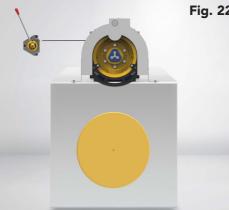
Connection and installation must be carried out in such a way that the lever and the flywheel can be operated simultaneously. Fig. 22 - 23 - 24. This allows you to perform the rescue system operation correctly.
